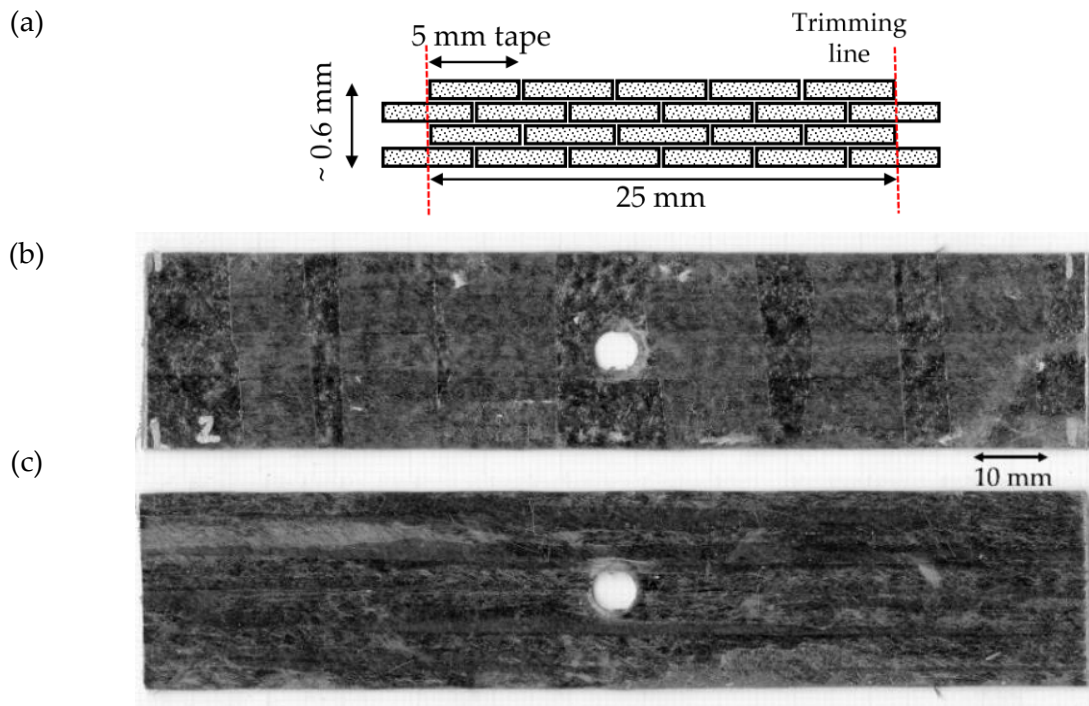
(a) Stacking sequence of the layup sample showing four layers with trimming lines to make a 25 mm wide sample; an example of a layup part with a cutting hole using a hollow punching tool: (b) top surface and (c) lower surface (surface attached to the metallic mould) [163].
